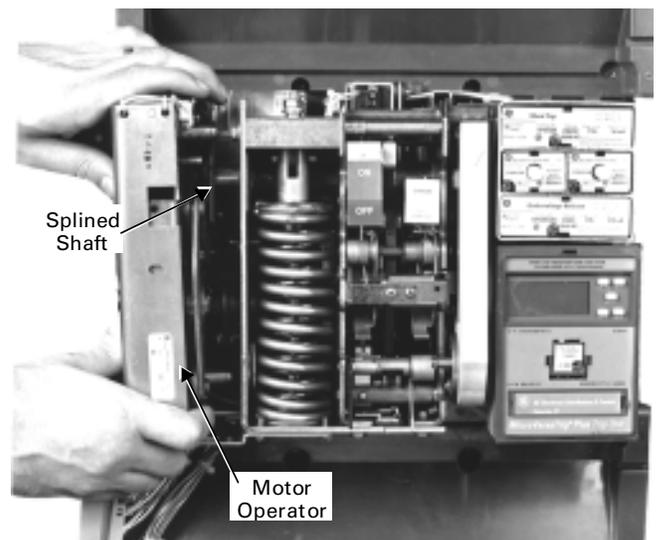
Motor Operator Mechanism aligned with the splined shaft in the breaker.
